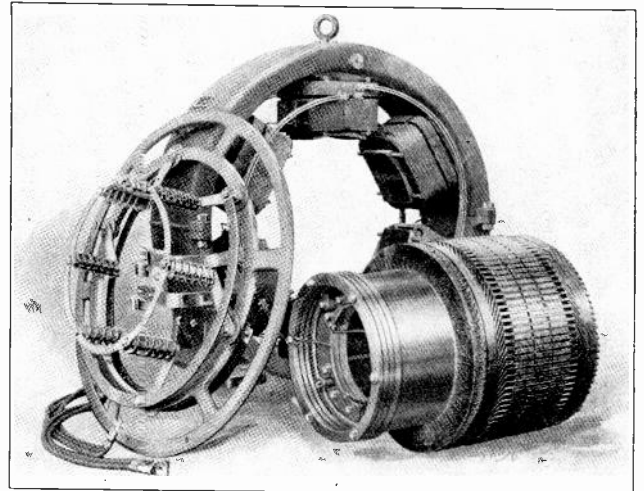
B. This view shows a three-wire generator disassembled. You will note the slip rings mounted on the end of the commutator.
